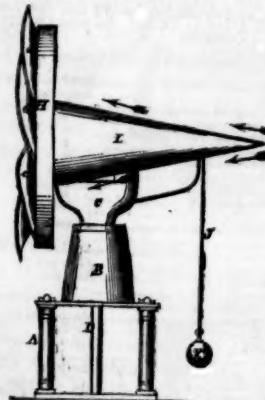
represents a back elevation of the wind-wheel; Fig. 2 is a side elevation; and Fig. 3 is a side sectional view. A is a suitable framing on which a block, B, is
